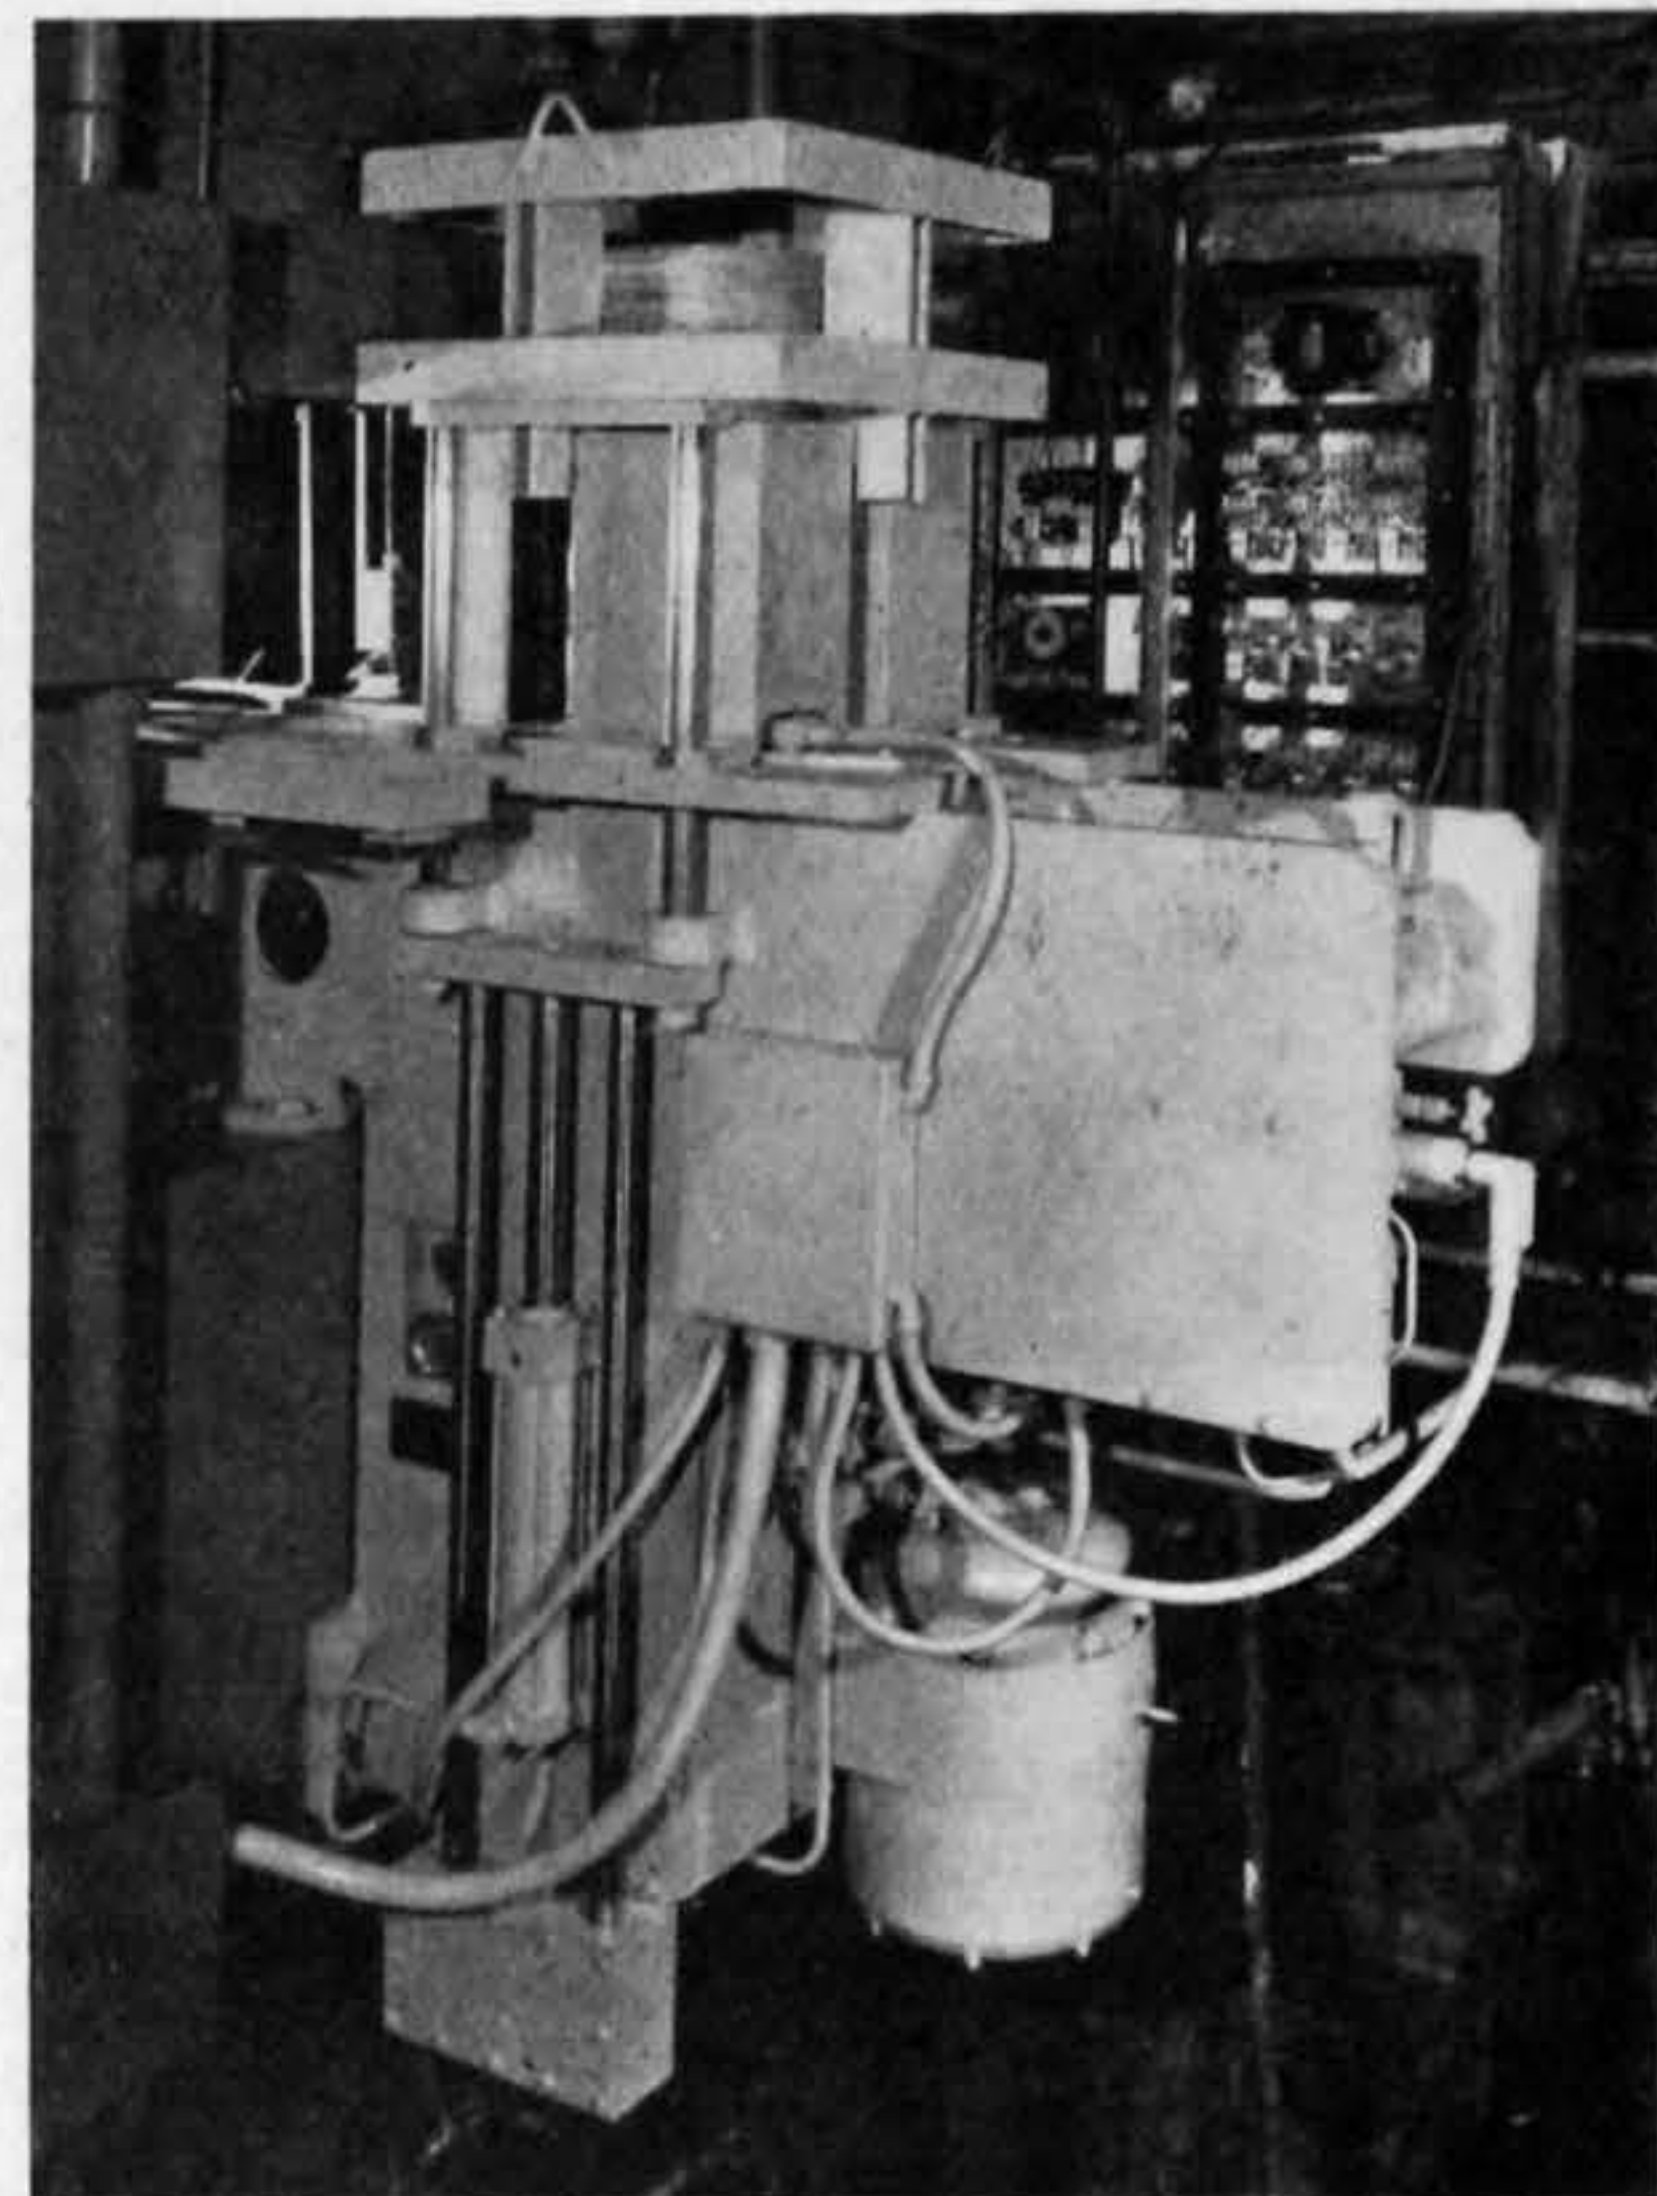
Stack feed containing wheel blanks mounted at entry side of press line
